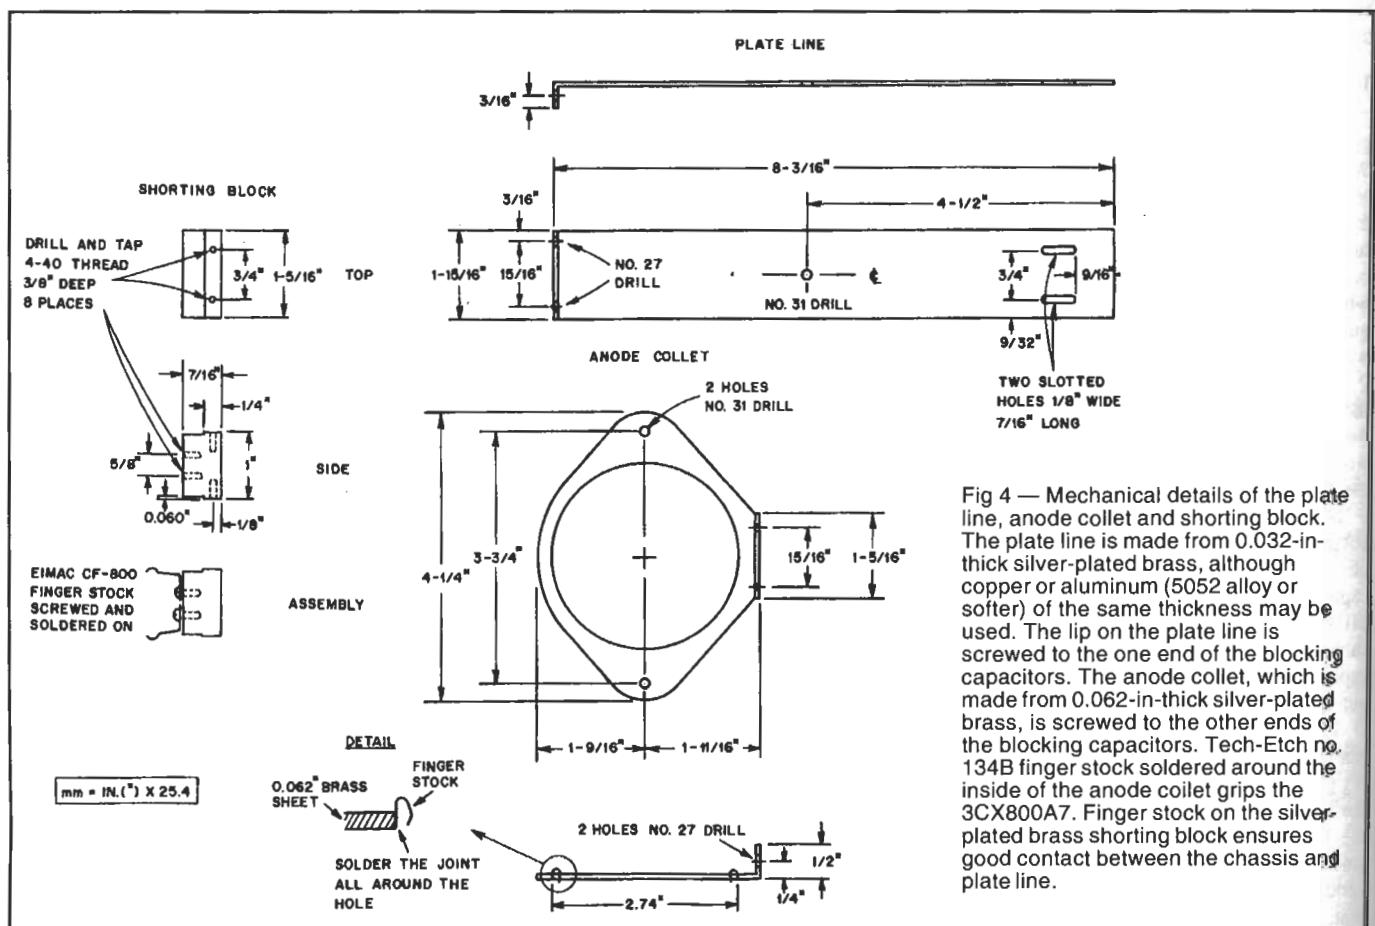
Mechanical details of the plate line, anode collet and shorting block. The plate line is made from 0.032-in-thick silver-plated brass, although copper or aluminum (5052 alloy or softer) of the same thickness may be used. The lip on the plate line is screwed to the one end of the blocking capacitors. The anode collet, which is made from 0.062-in-thick silver-plated brass, is screwed to the other ends of the blocking capacitors. Tech-Etch no. 134B finger stock soldered around the inside of the anode collet grips the 3CX800A7. Finger stock on the silver-plated brass shorting block ensures good contact between the chassis and plate line.
